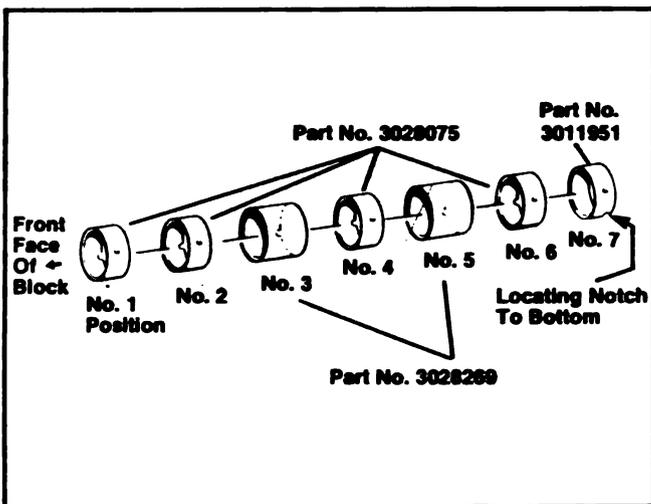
Install The Thicker Wall Bushings Into These Locations (Big Cam Engines).
